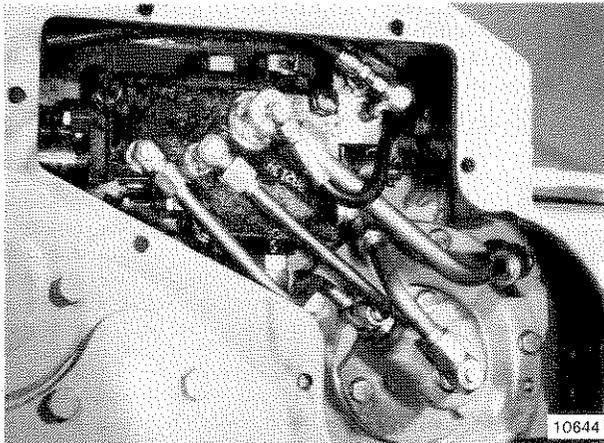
INSTALLATION OF THE HYDRAULIC PUMP
